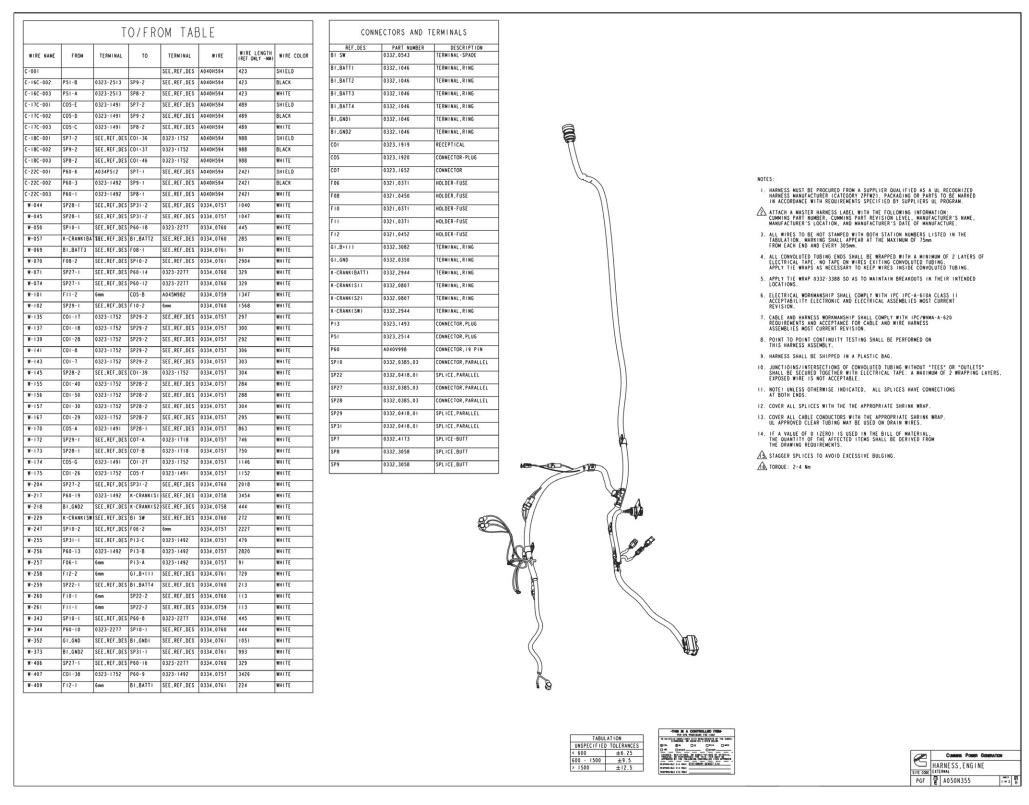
A050N355 ENGINE HARNESS (SHEET 1)
